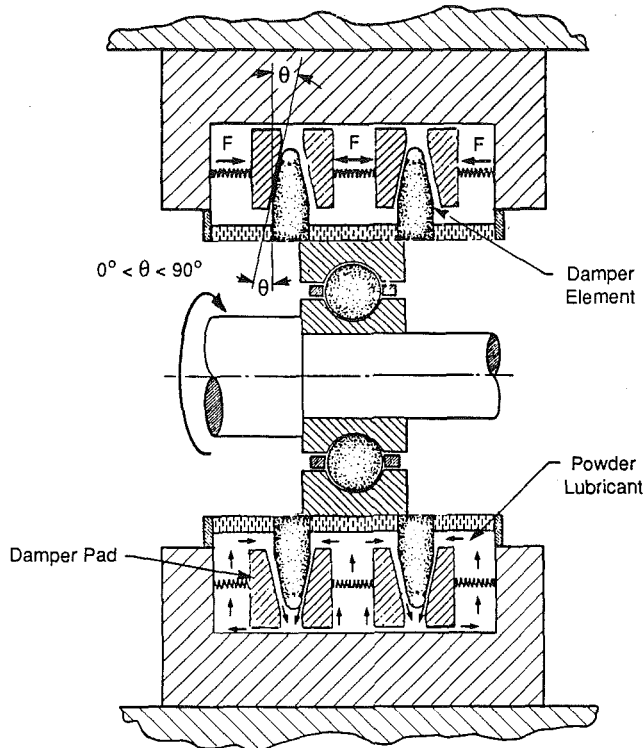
Schematic of high-temperature dry powder-lubricated damper for a turbine engine bearing
